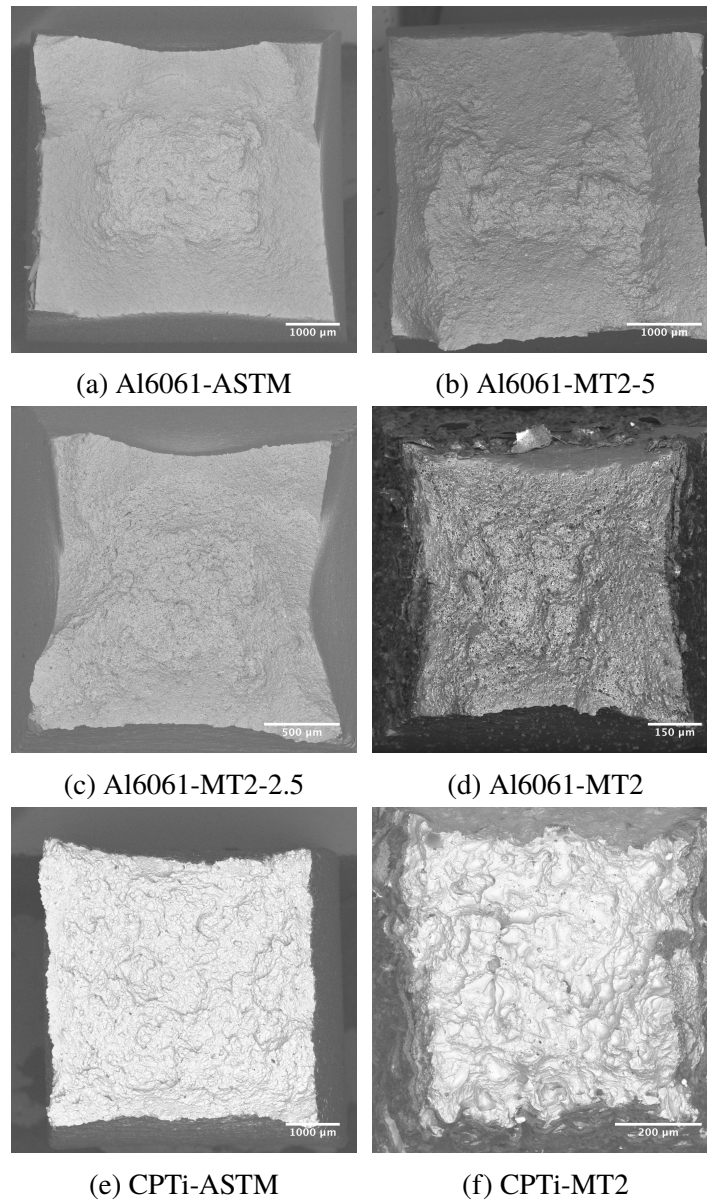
Fracture surface of tested specimens. The image plane was perpendicular to the load axis.
